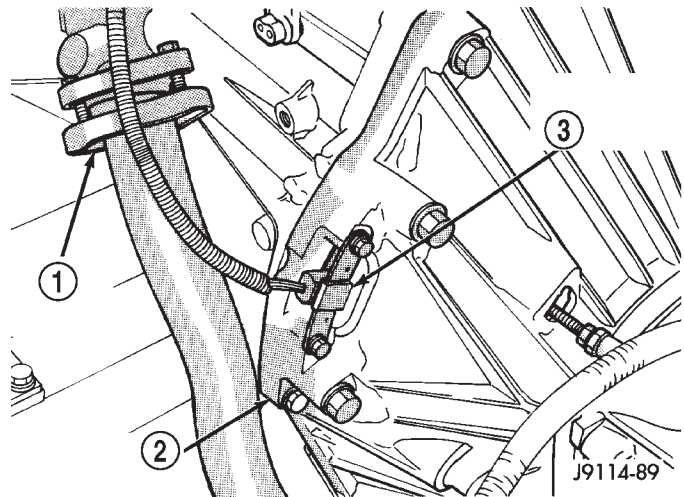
Crankshaft Position Sensor—2.5L Engine
